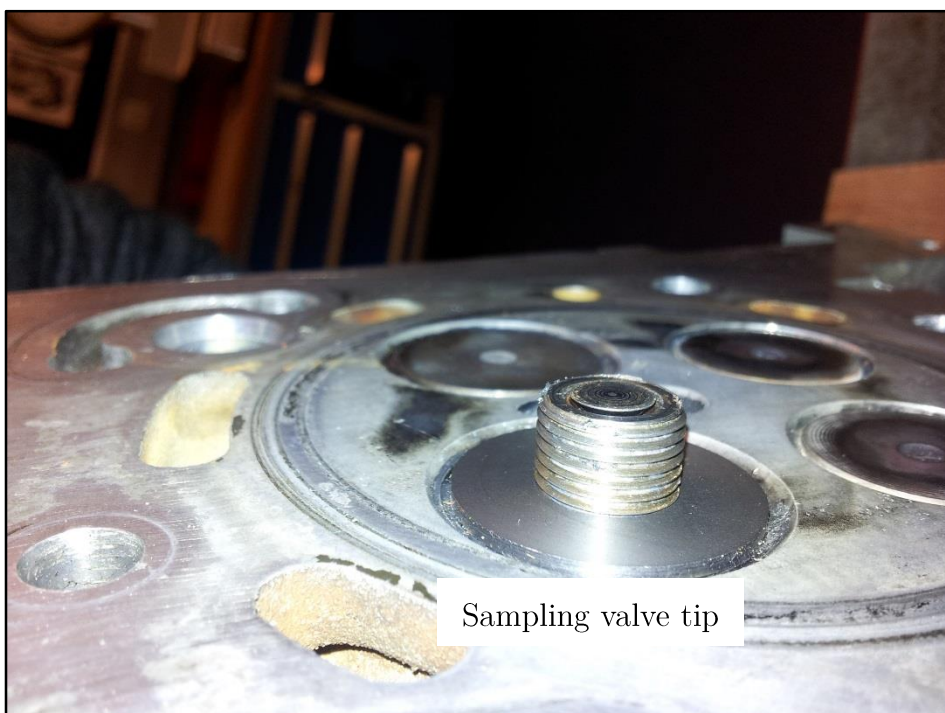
Tip of the gas sampling valve protruding through the dummy valve in the cylinder head
